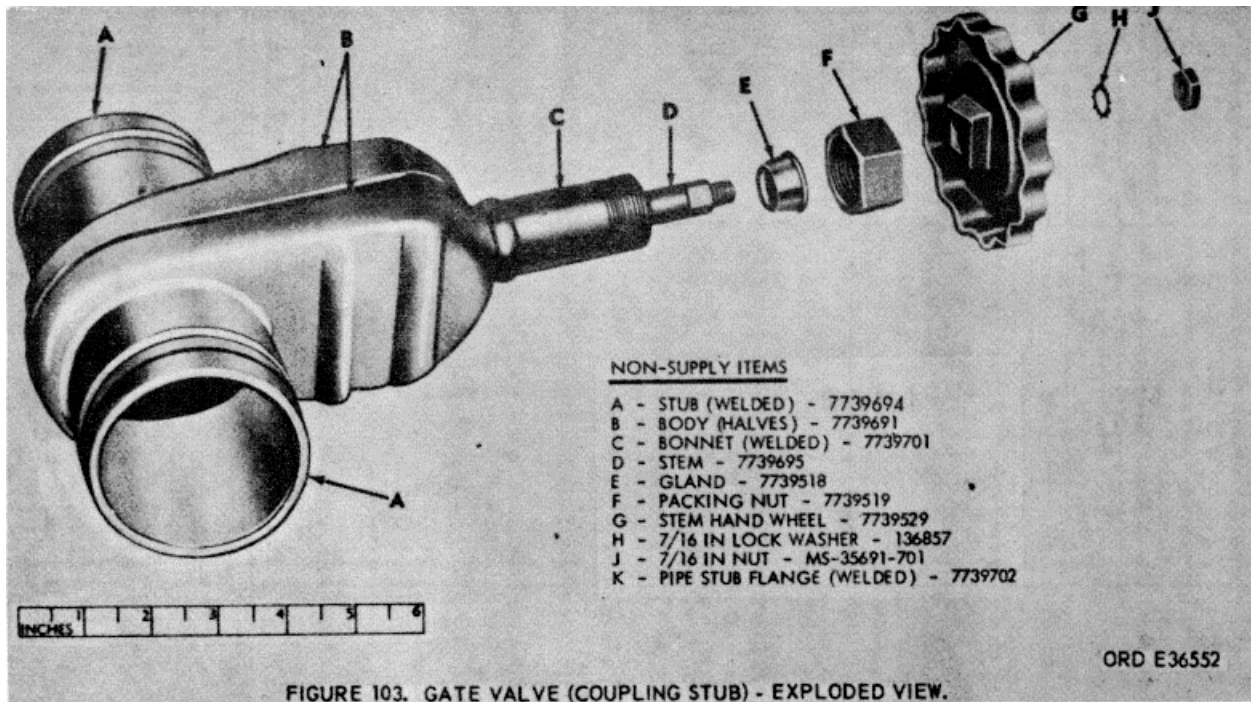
GATE VALVE (COUPLING STUB) - EXPLODED VIEW.
